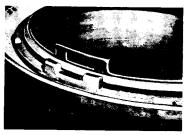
Fig. 25. Align driver pockets in bead seat band and base as shown.
